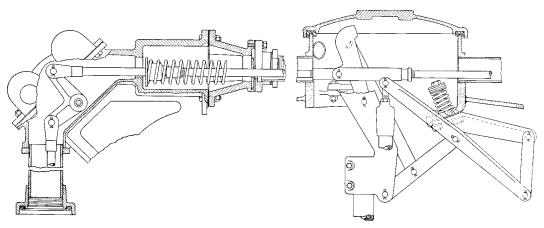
Main Assembly Details, Type G-2, 187,000 Volt Breakers
